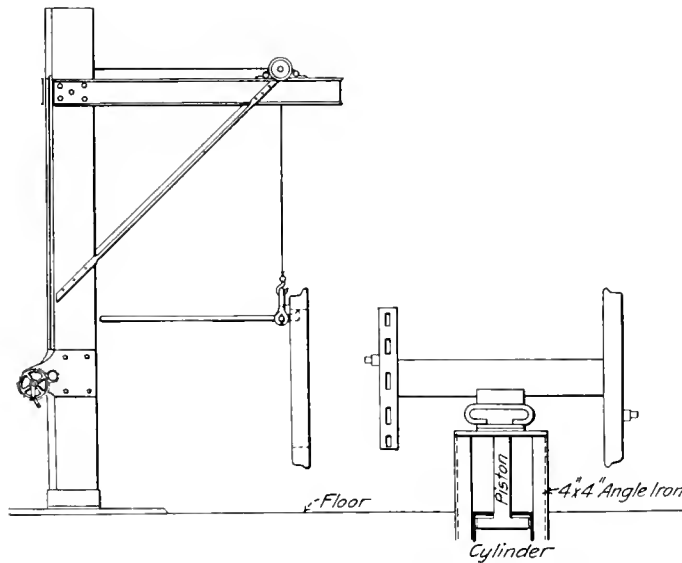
Apparatus Used for Mounting Driving Wheel Tires
